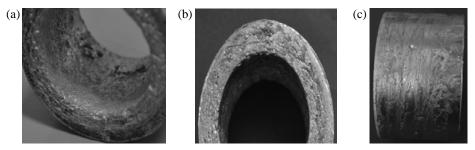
Physical properties of casting with temperature 710 °C. (a) Inner surface; (b) side surface; (c) outer surface
